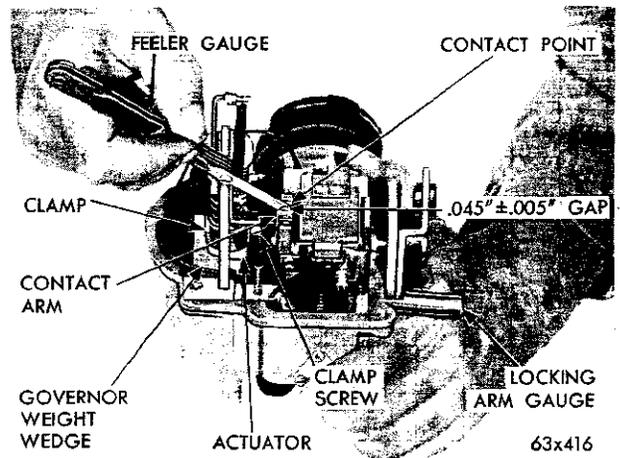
Contact Point Adjustment (Contact Arm Centered)
